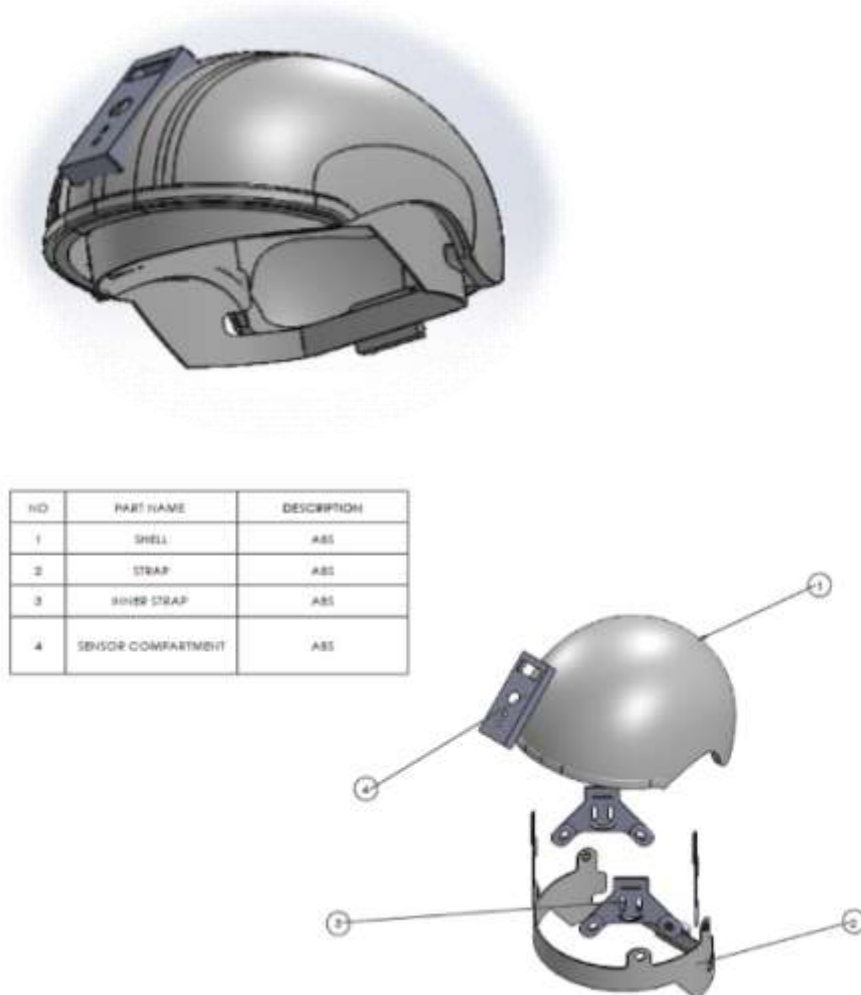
Assembly and exploded view of safety helmet integrated with gas sensor and GPS system
